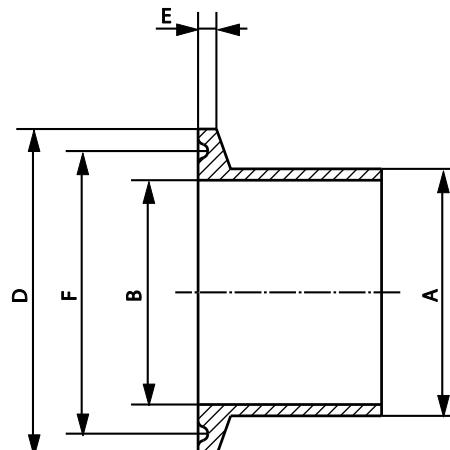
Sectional drawing of a clamp fitting acc. to ASME BPE -BO
